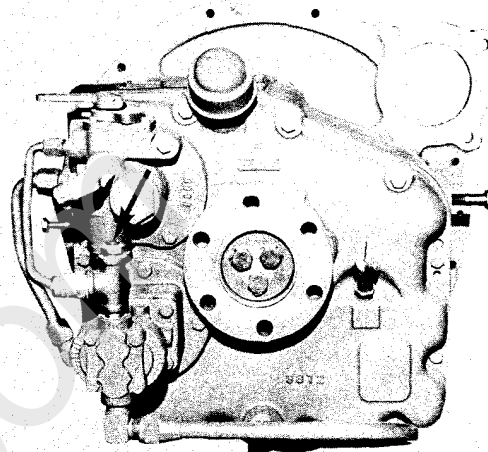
, (V11939). Twin Disc marine gear pressure check point
